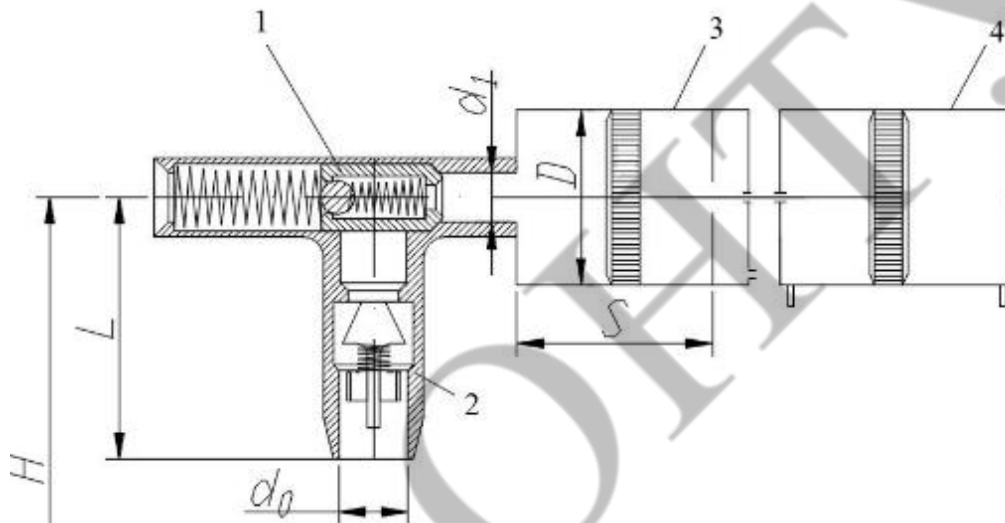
The scheme of the piston batcher: 1 – locking element; 2 – outlet pipe; 3 – dosing cylinder; 4 – pneumatic cylinder
